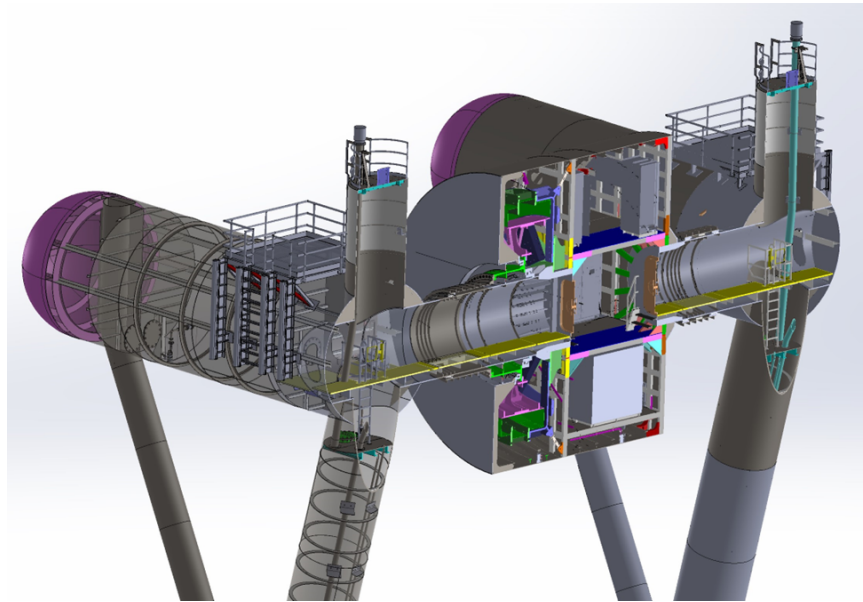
Section/transparent view of nacelle and spar tube, showing access.
